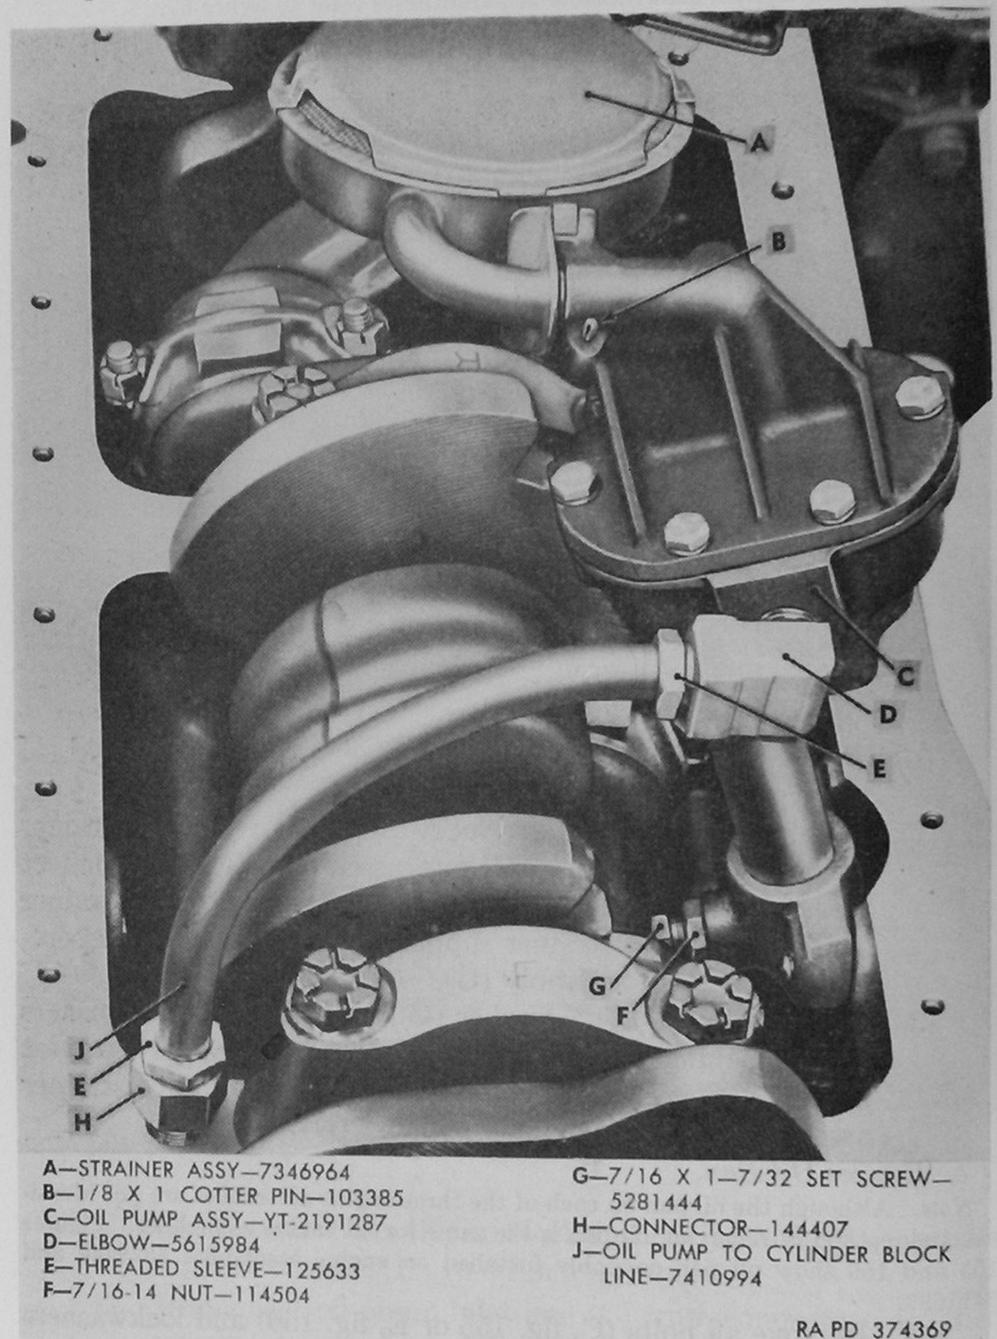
Oil pump and strainer assembly installed—engine assembly 8726920.
